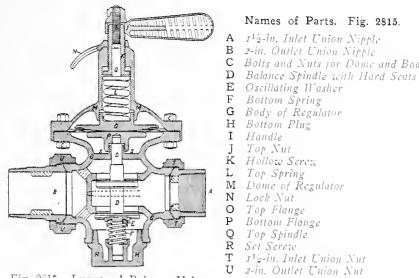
Improved Balance Valve Pressure Regulator, No. 529.
